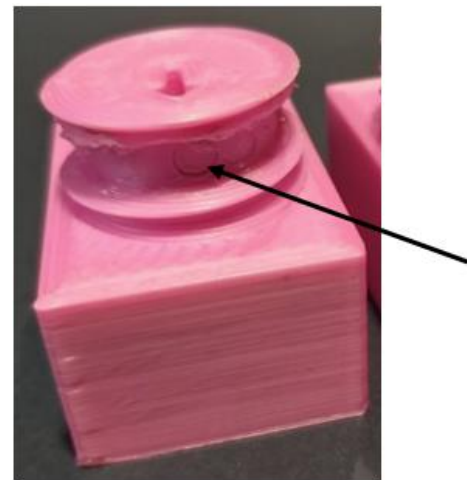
Slot of the threaded part showing the damages of a metal screw
